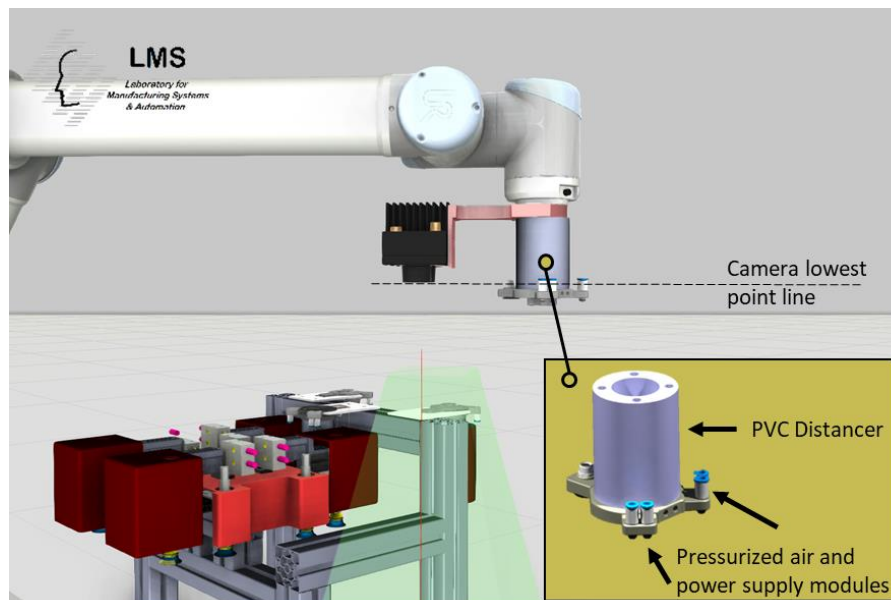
Wingman robot part assembly with the distancer to avoid camera collisions
